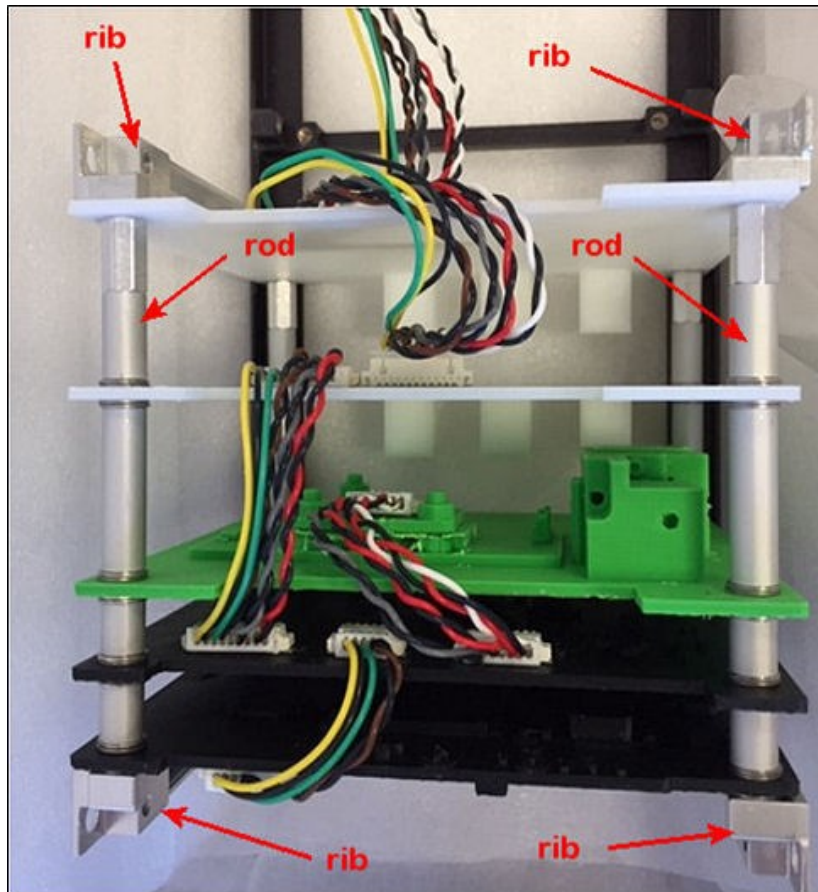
Mock harness installed on 3D-printed bottom stack mock-up experiments.
